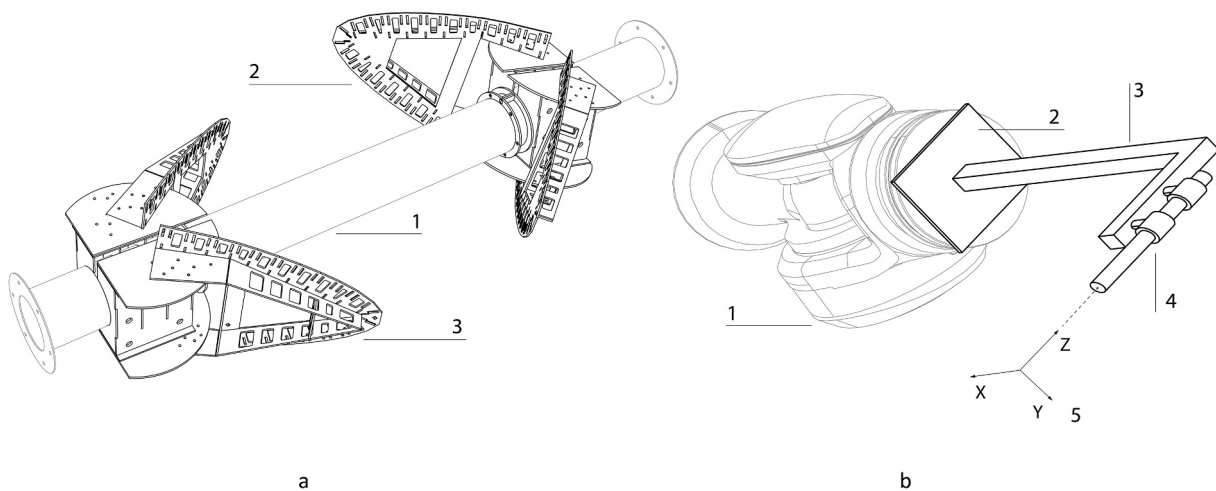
RCFW tooling: a. winding tools: 1. metal tube – interface with the KP1 rotational positioner; 2., 3. Modular steel winding tools; b. robotic end-effector - modular fiber guide: 1. KR 210 robotic manipulator wrist; 2. end-effector flange connection; 3. end-effector body – metal tube, square cross-section; 4. end-effector fiber guide - ceramic-fitted steel tube, round cross-section; 5. TCP local Cartesian coordinate system, (c) ICD.
